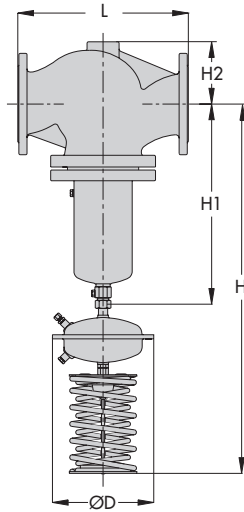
· Dimensional drawing of Type 2422/2425 Excess Pressure Valve
